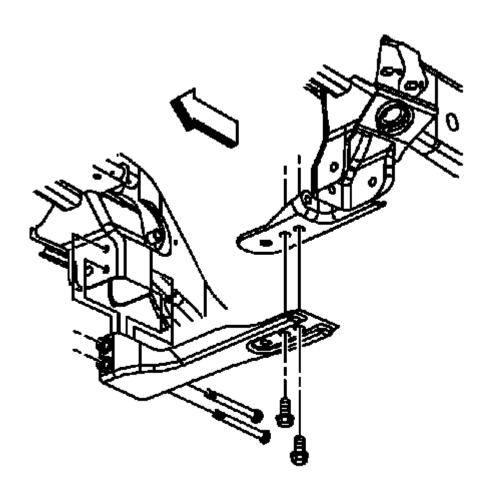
View Of Crossmember Bolts & Bar (4WD Only) Courtesy of GENERAL MOTORS CORP.
